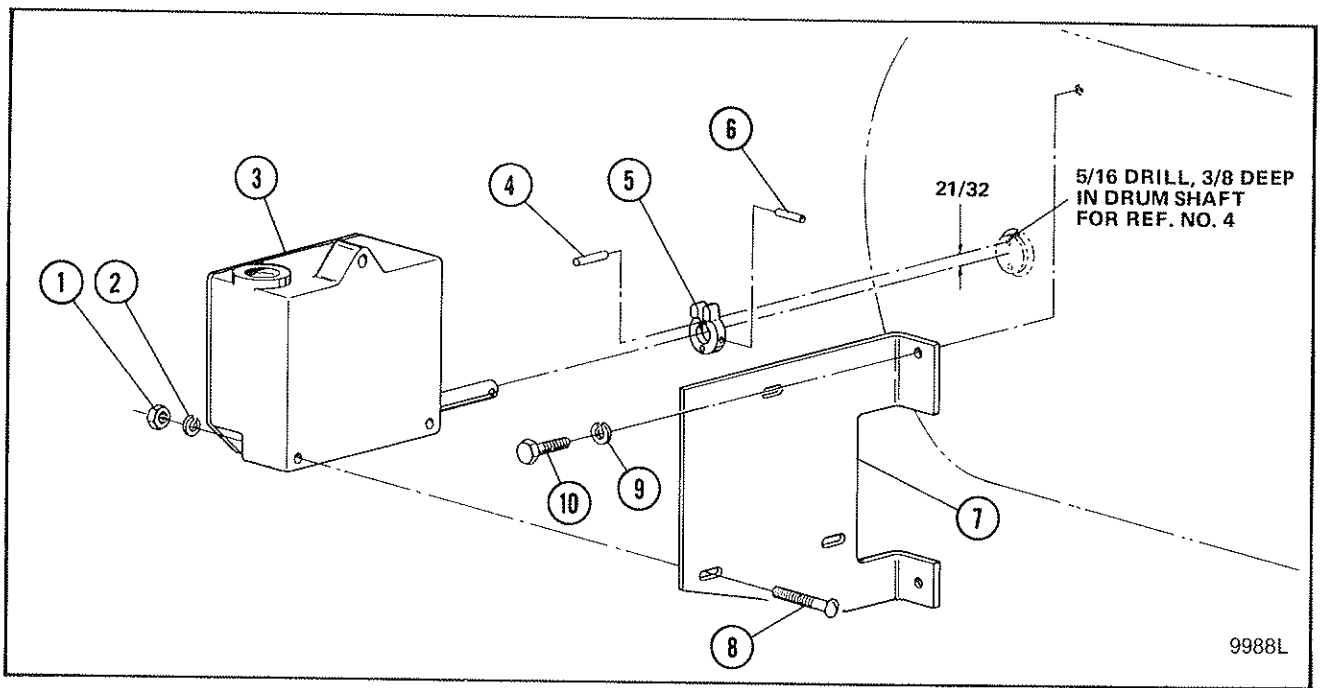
Upper & Lower Limit Switch — Geared Rotary Type.
